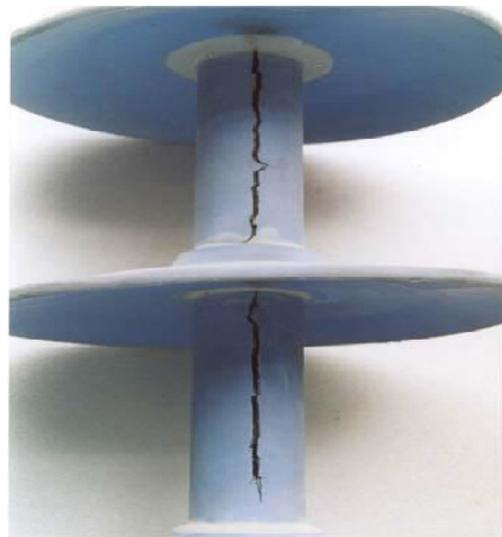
Example of defective (improperly glued to core) housing after 4 kV/ns steep-front impulse test.
